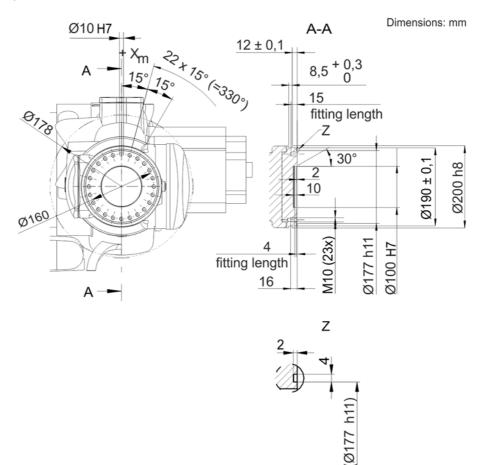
Mounting flange D=160 for F-HP in-line wrist
